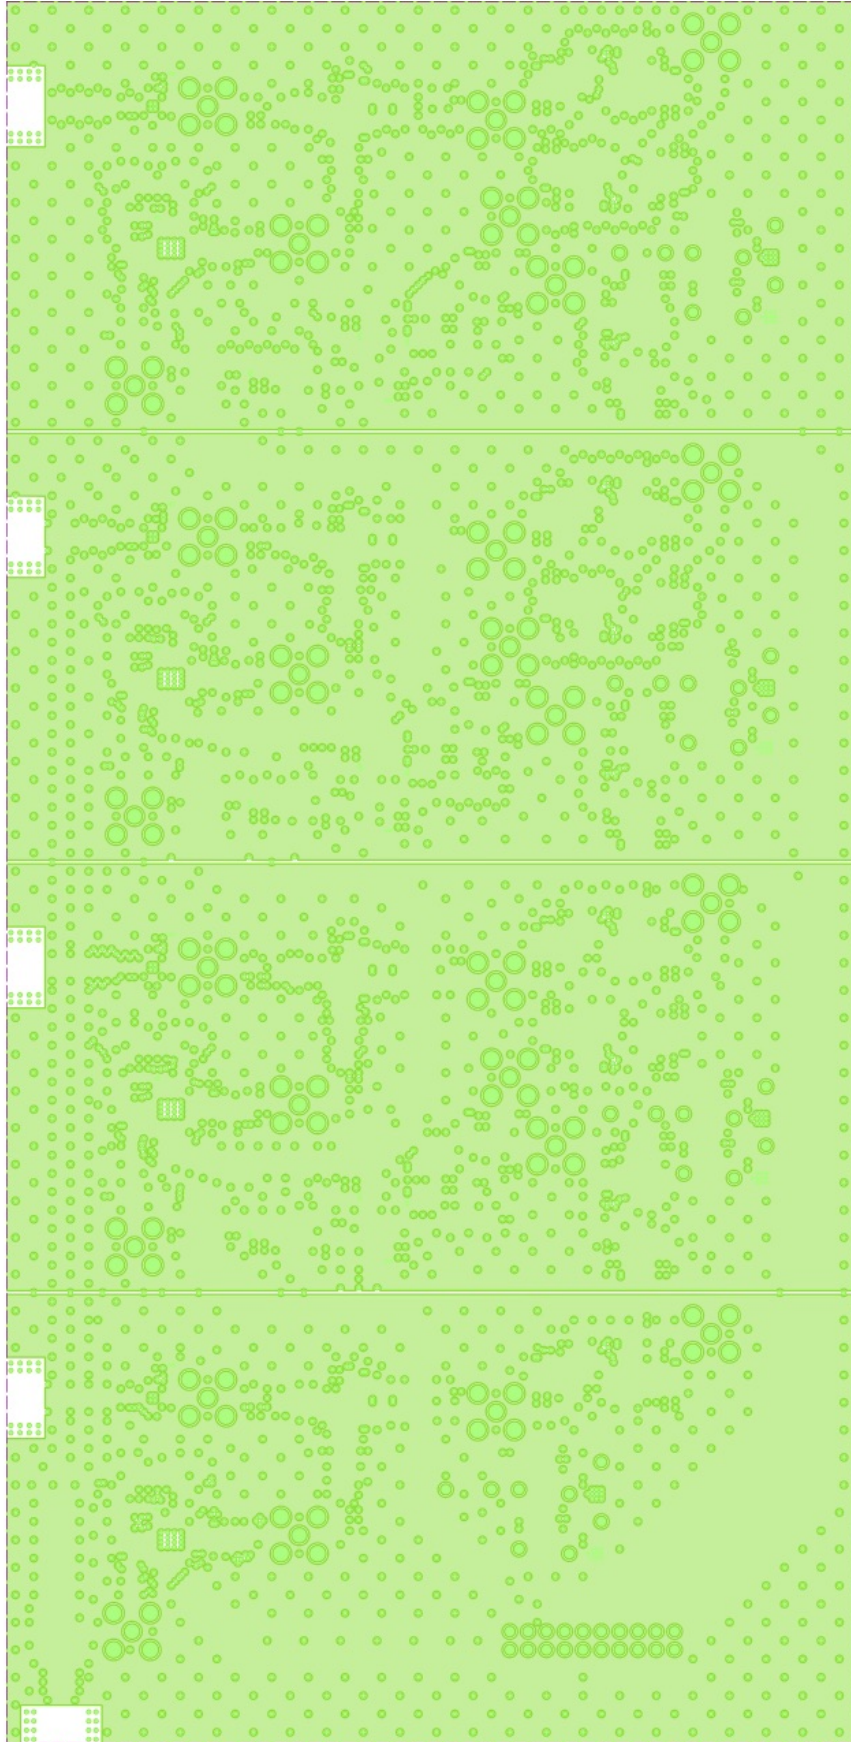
DLL-HPC received signal beamformer PCB inner layer 2
